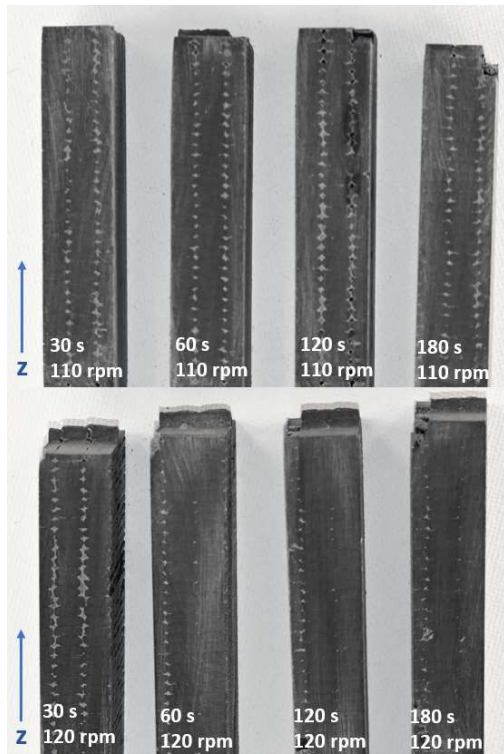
Four tensile bars are waterjet cut from each 3D printed slab then machined.
